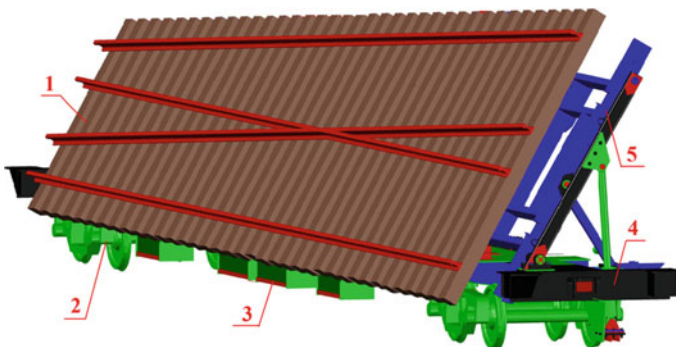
The main components of platform MPP-61 with three-component tilted cargo lifting equipment: 1—intermediate crossing assembly; 2—bogies of typical platform; 3—diesel engine, hydraulic pump and electrical equipment; 4—frame of typical platform; 5—tilted cargo lifting component
